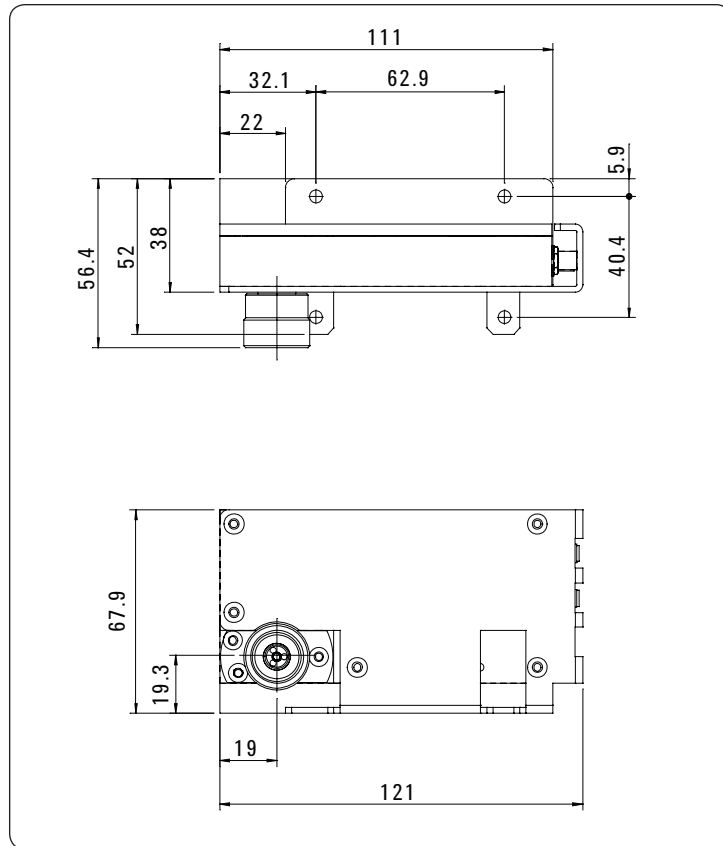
Option E4991A-010 test head dimensions (in millimeters, nominal)
